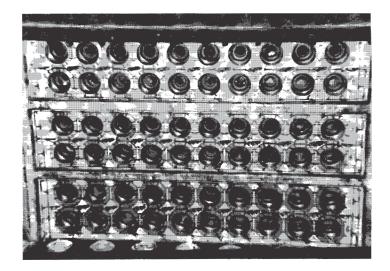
View of Wagstaff AIR-SLIP^m casting unit for 6" diameter billet showing the high mold density.
